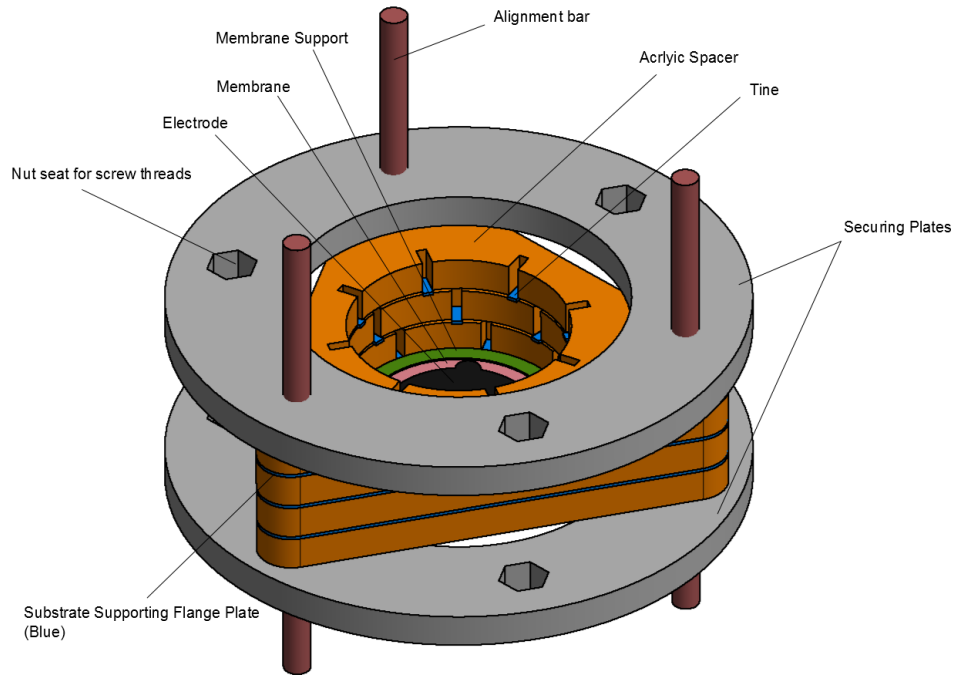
CAD drawing of arranged components for conceived stacking rig.
